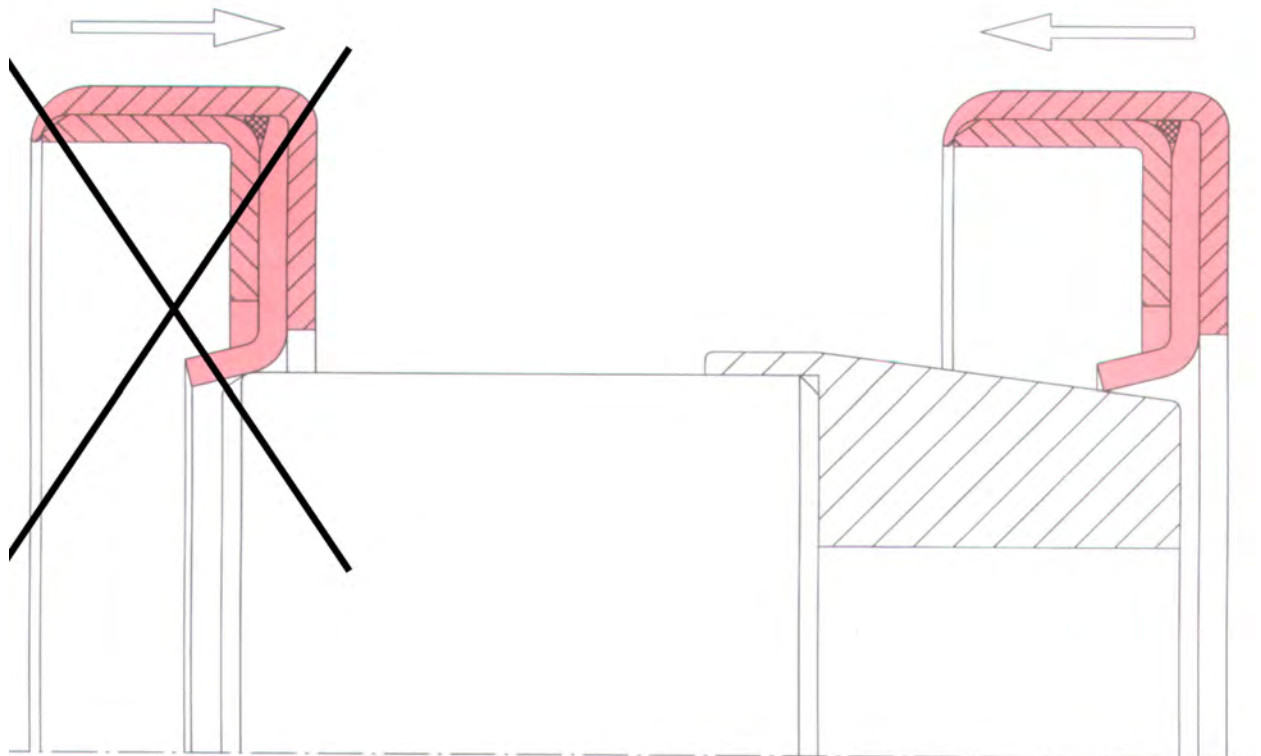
Installing rotary shaft seal with PTFE sealing lip
